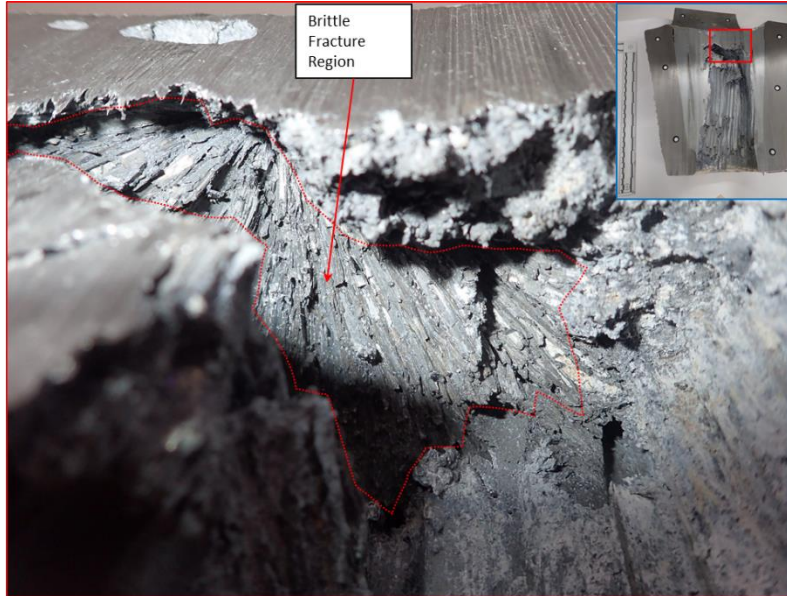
(Appendix A Figure 65). View of Casting Cap Side of Brittle Fracture Region in Back of Socket Cavity on Slice 3a (view 1)
